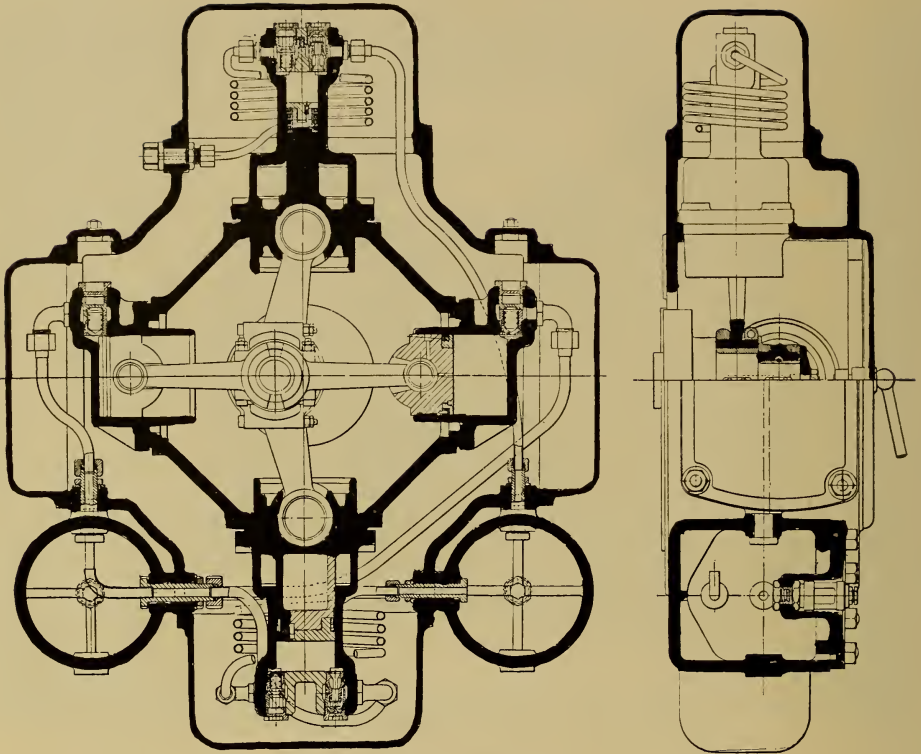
SECTION OF THREE-STAGE COMPRESSOR FOR 1,000 POUNDS PRESSURE.
